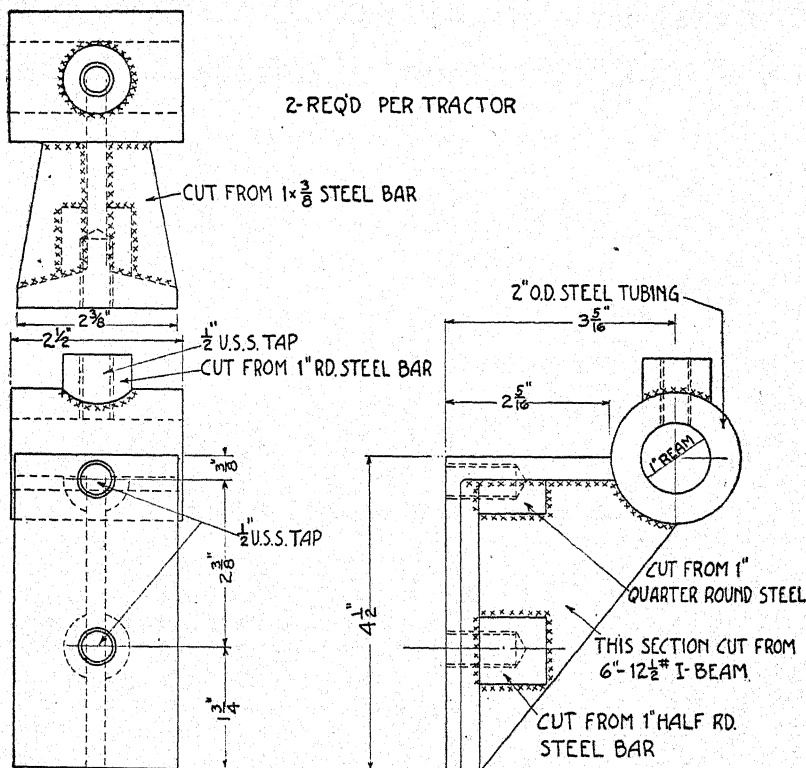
Clutch throw-out shaft bearing, arc welded at \$1.58 saving.
